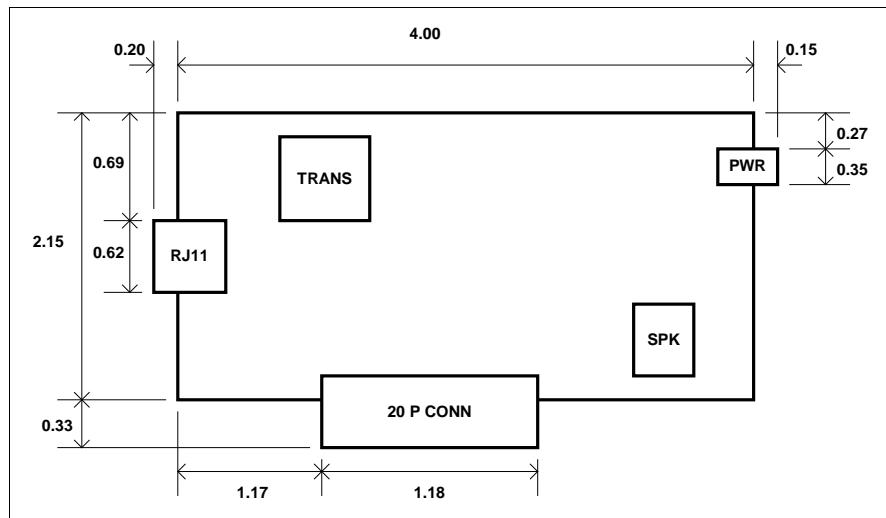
73M1903C Evaluation Board PCB Dimensions
